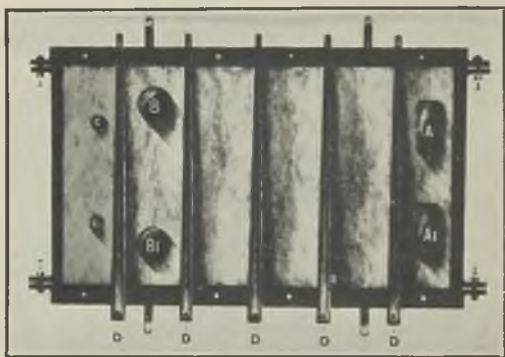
MOULDING BOX MADE FROM LOOSE SIDES WITHOUT BARS CAST IN.
